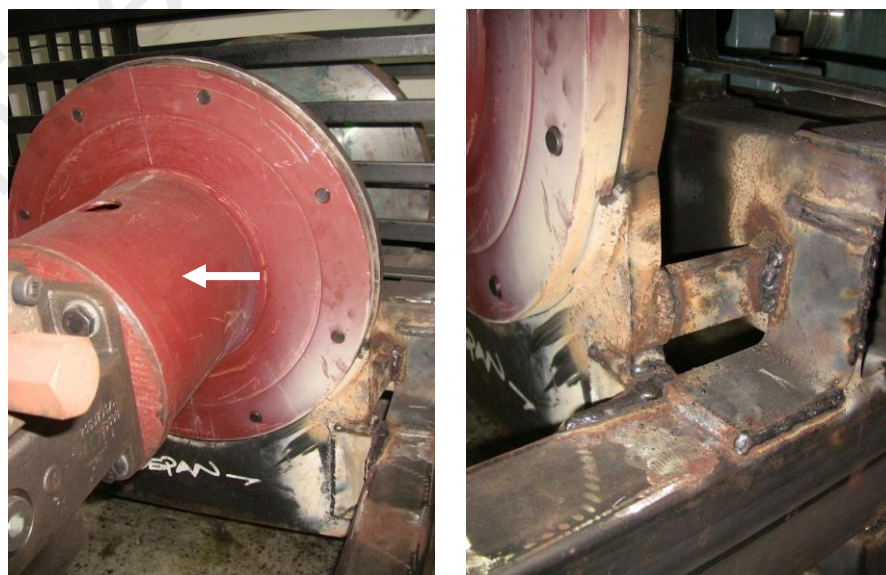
(Left) (a) Bell housing (Right) bell housing fixed on plate weld on test rig chassis.
